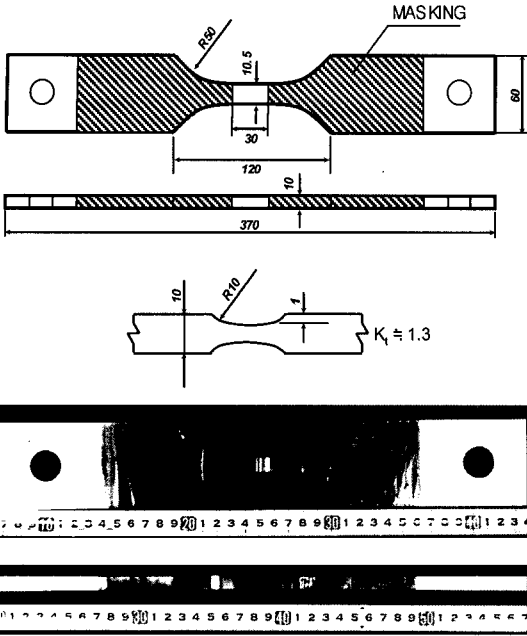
Shape of corrosion fatigue crack initiation test specimen
